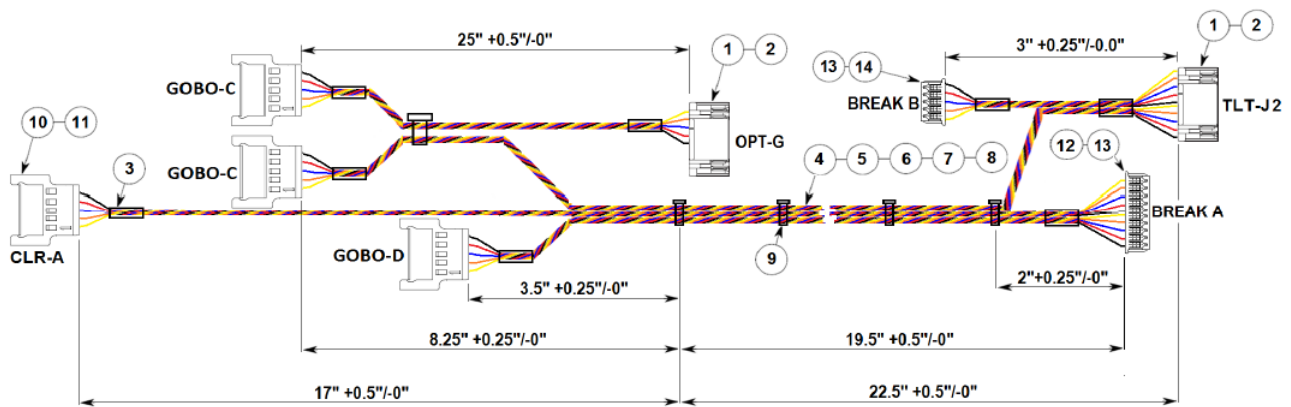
VL4000 Main to Bulkheads Data Cable Assembly
